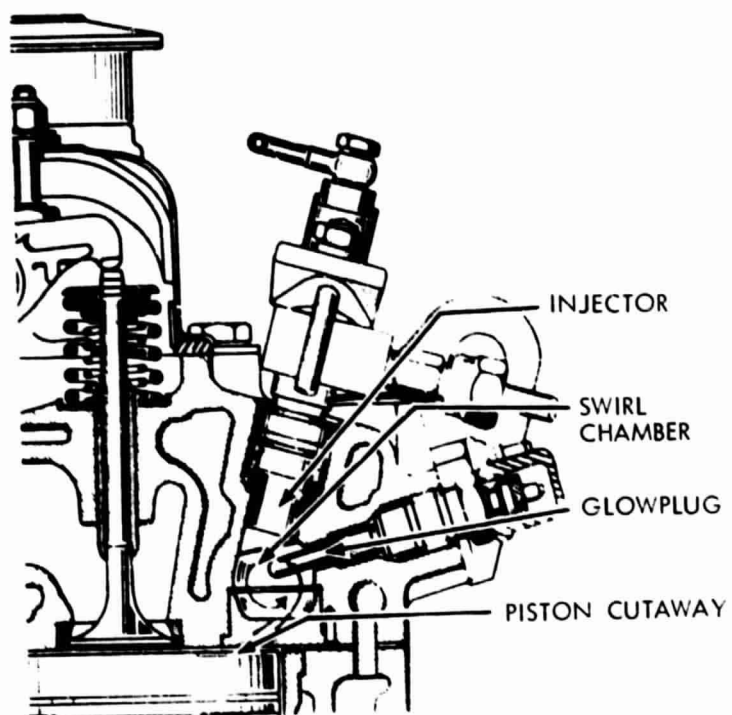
Peugeot Combustion Chamber Design for 2.1-l 504 Diesel Engine (Ref. 18)
